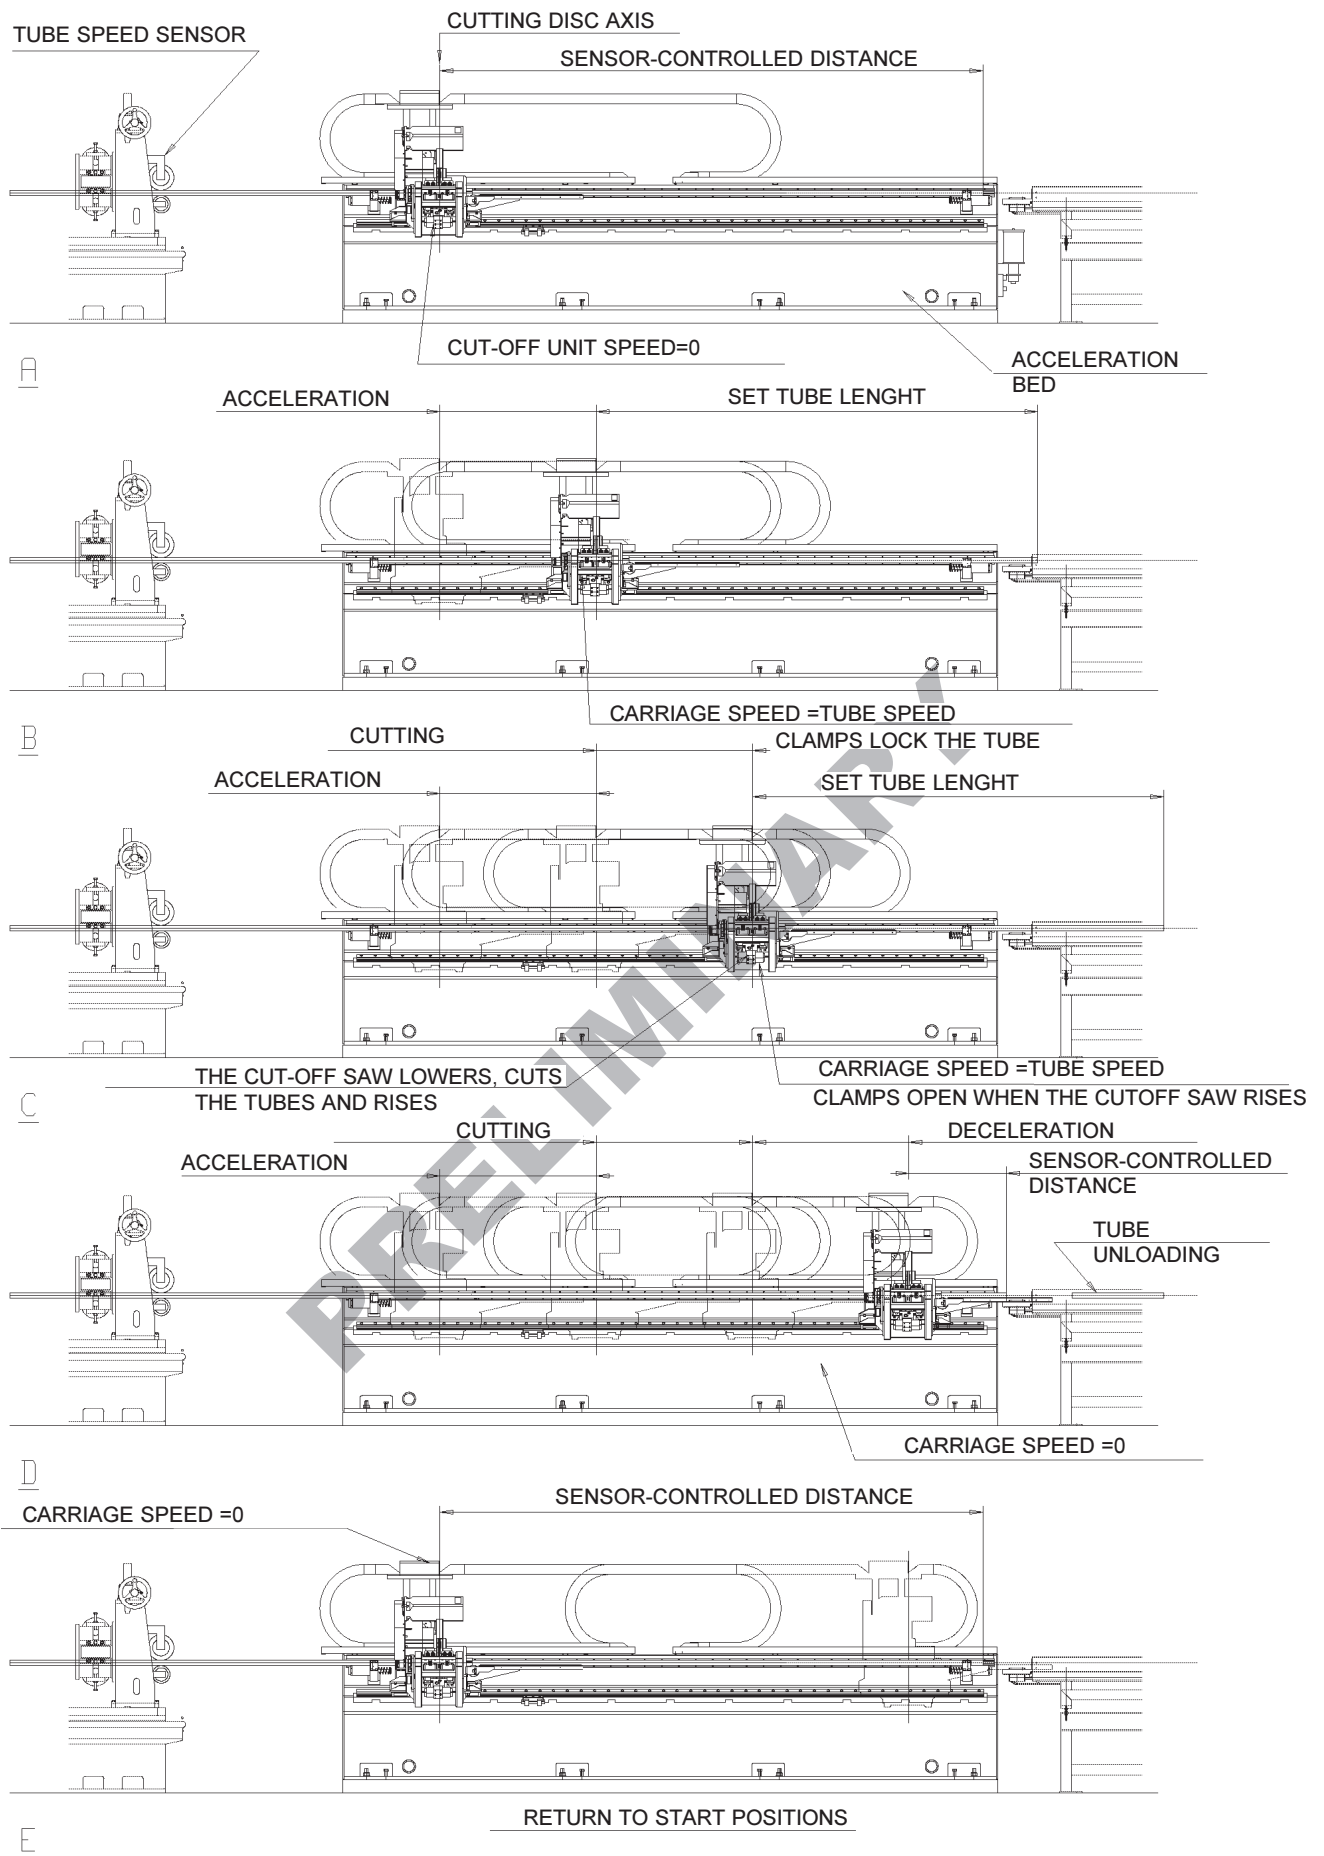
Figure C illustrates the synchronism phase whereby the carriage and tube move at the same speed and the saw head lowers to cut the tube.
